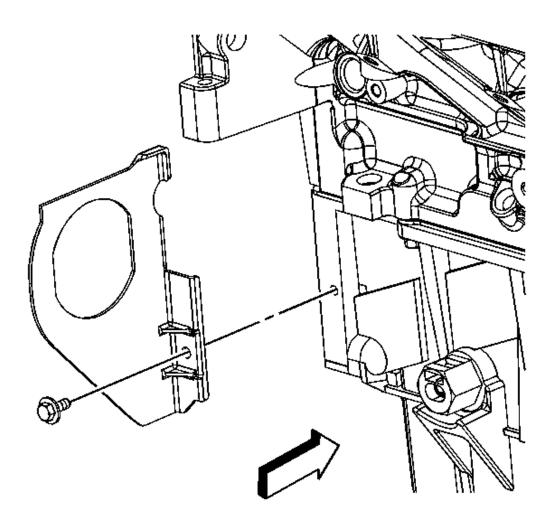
View Of Right Side Transmission Cover Bolt Courtesy of GENERAL MOTORS CORP.
